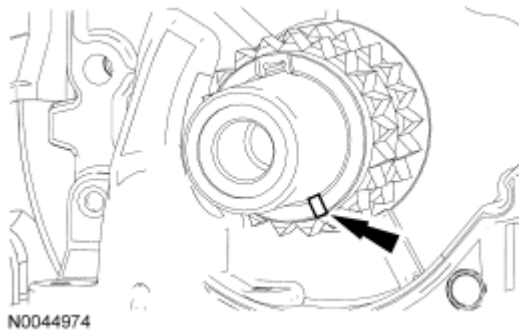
Locating Timing Marks On Crankshaft Sprockets
